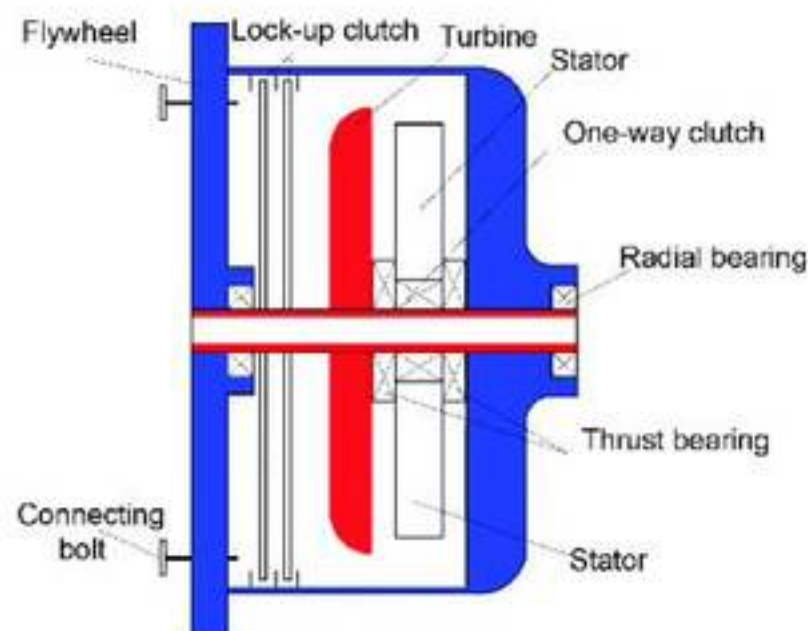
Schematic representation of Hydraulic Torque Converter Automatic Transmission illustrating the layout of key components [6].
